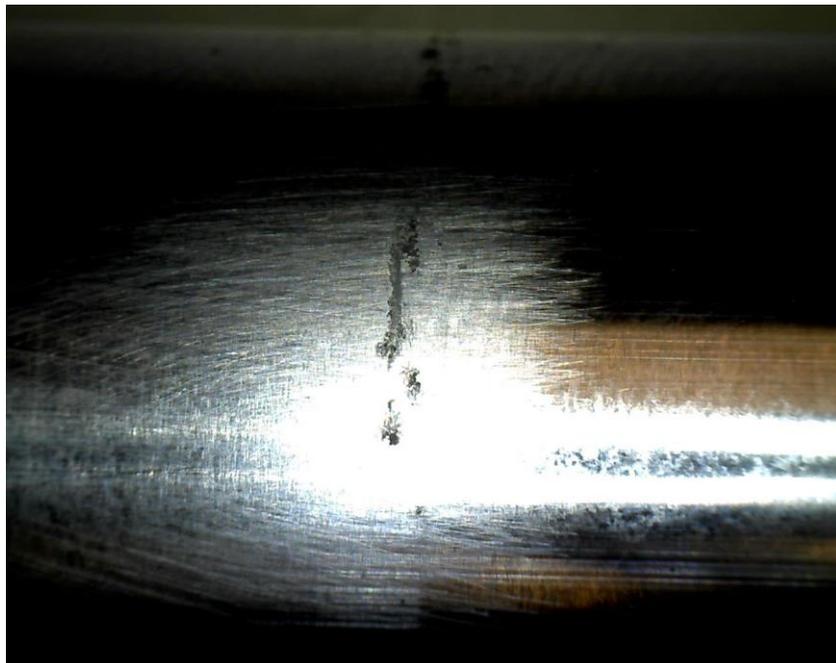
Left roll control actuator piston showing the abrasion area under a microscope.
